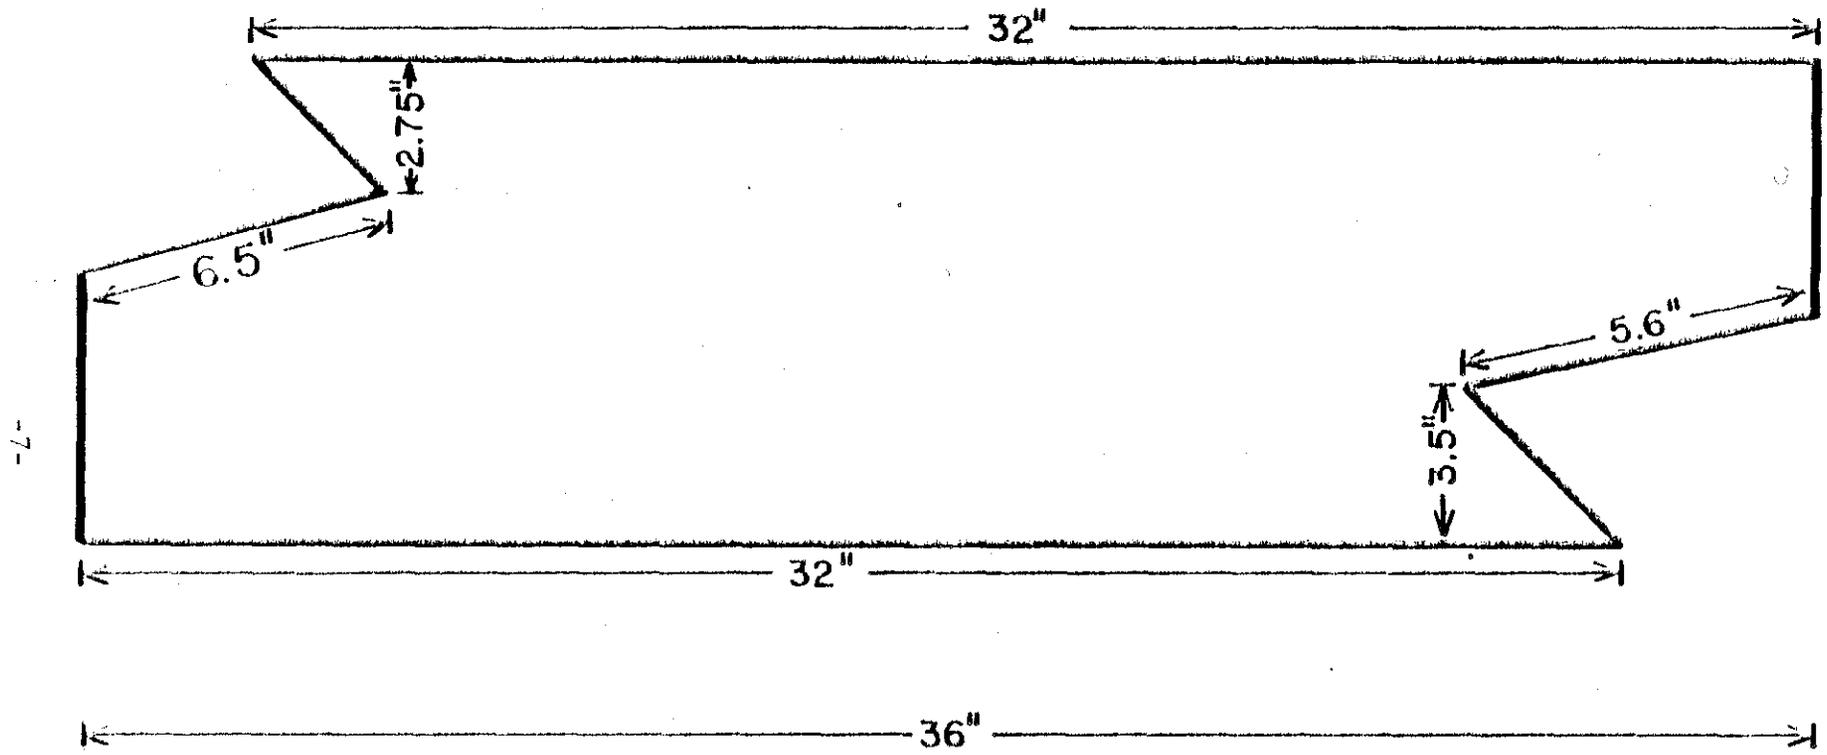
Modified cutting board for improved fillet yield. For best results, the board is mounted at a 12° upward angle towards the cutter.
